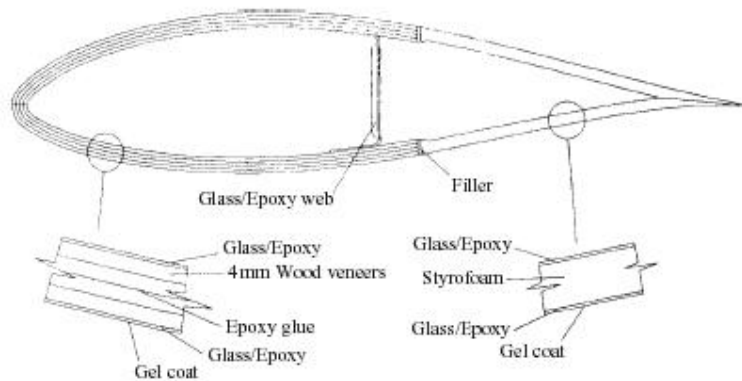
Wood/Epoxy Blade Construction Utilizing Forward Half of Blade Shell
